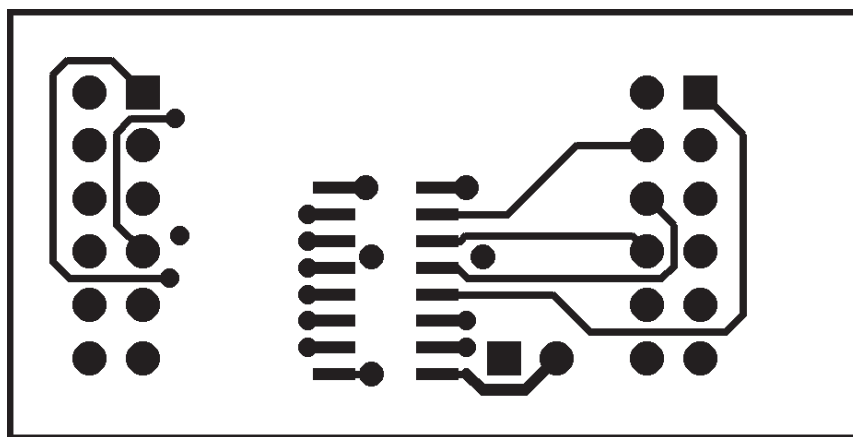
MAX14850PMB1 Peripheral Module PCB Layout—Component Side
